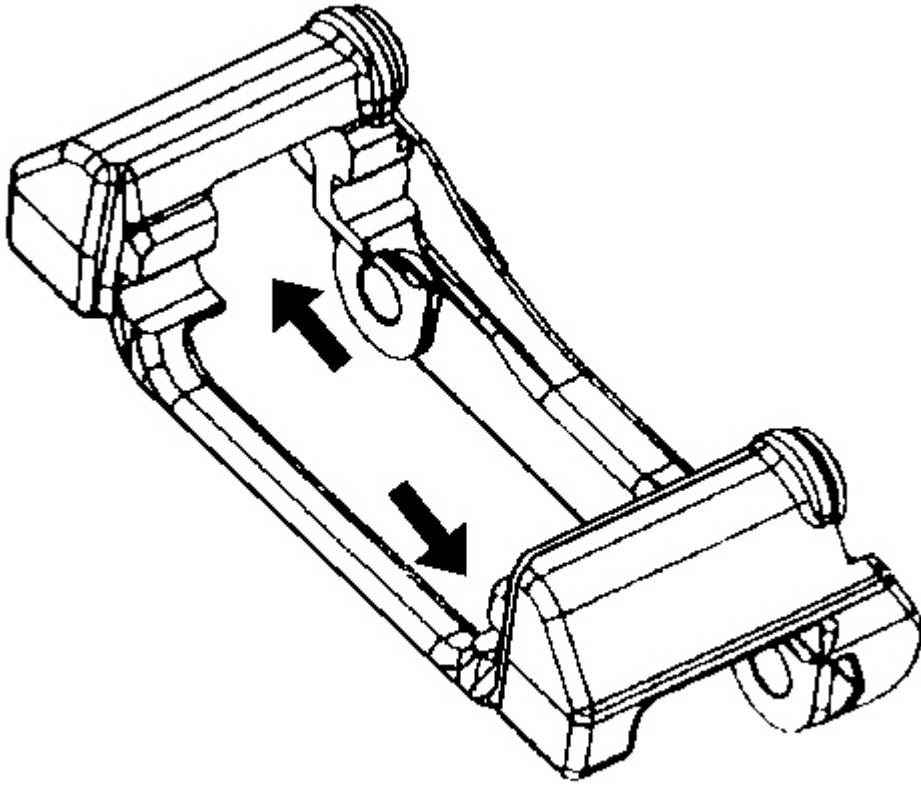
Inspecting Brake Caliper Mounting Bracket Guide
